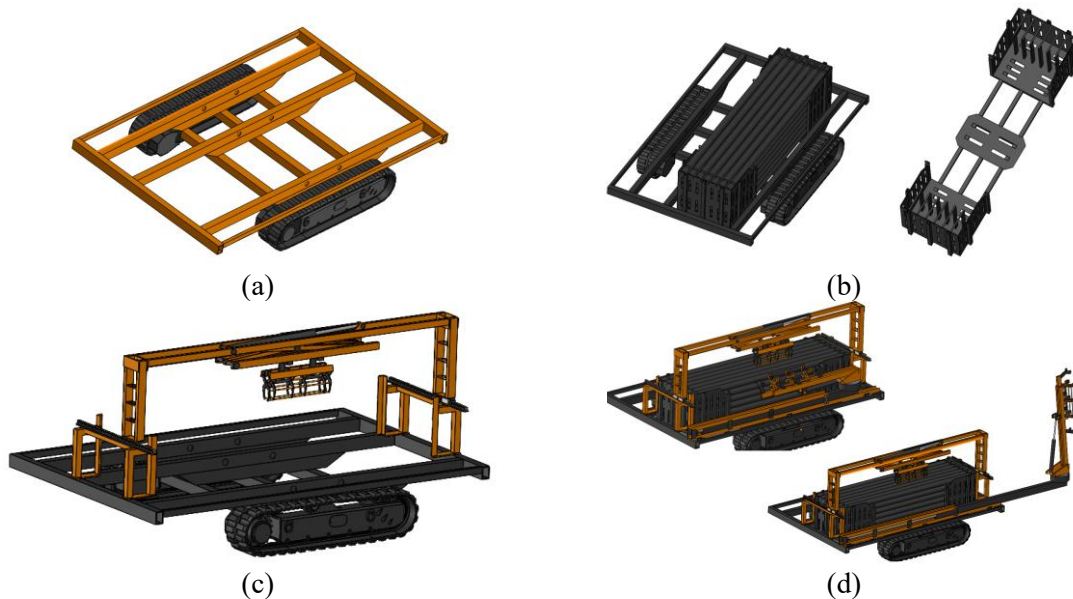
(a) The equipment chassis; (b) Drill pipes stand; (c) The equipment drawbridge; (d) The robotic arm for pipes handling.
